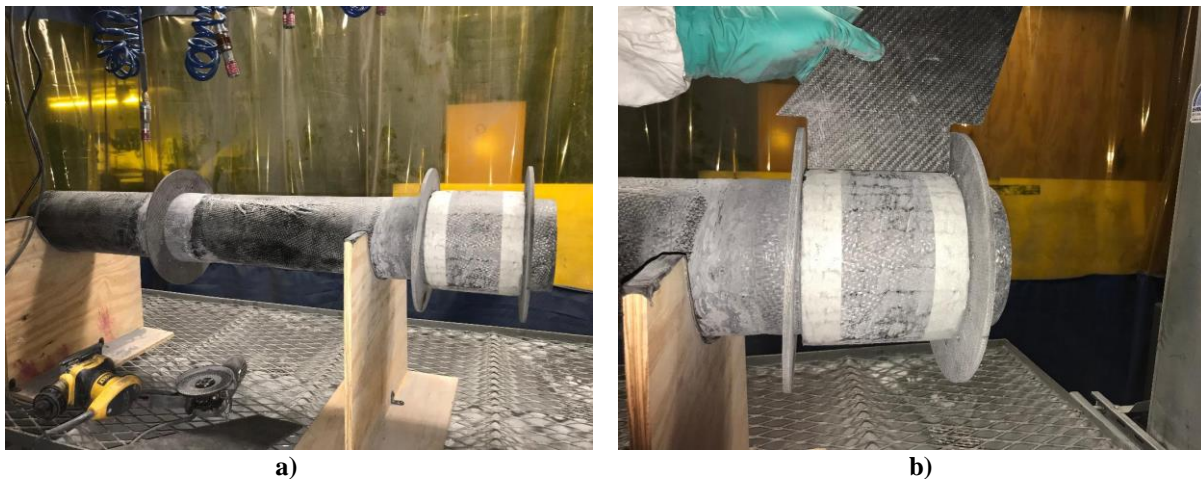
Completed motor tube. a) Centering ring placement. b) Fin placement with centering rings.
